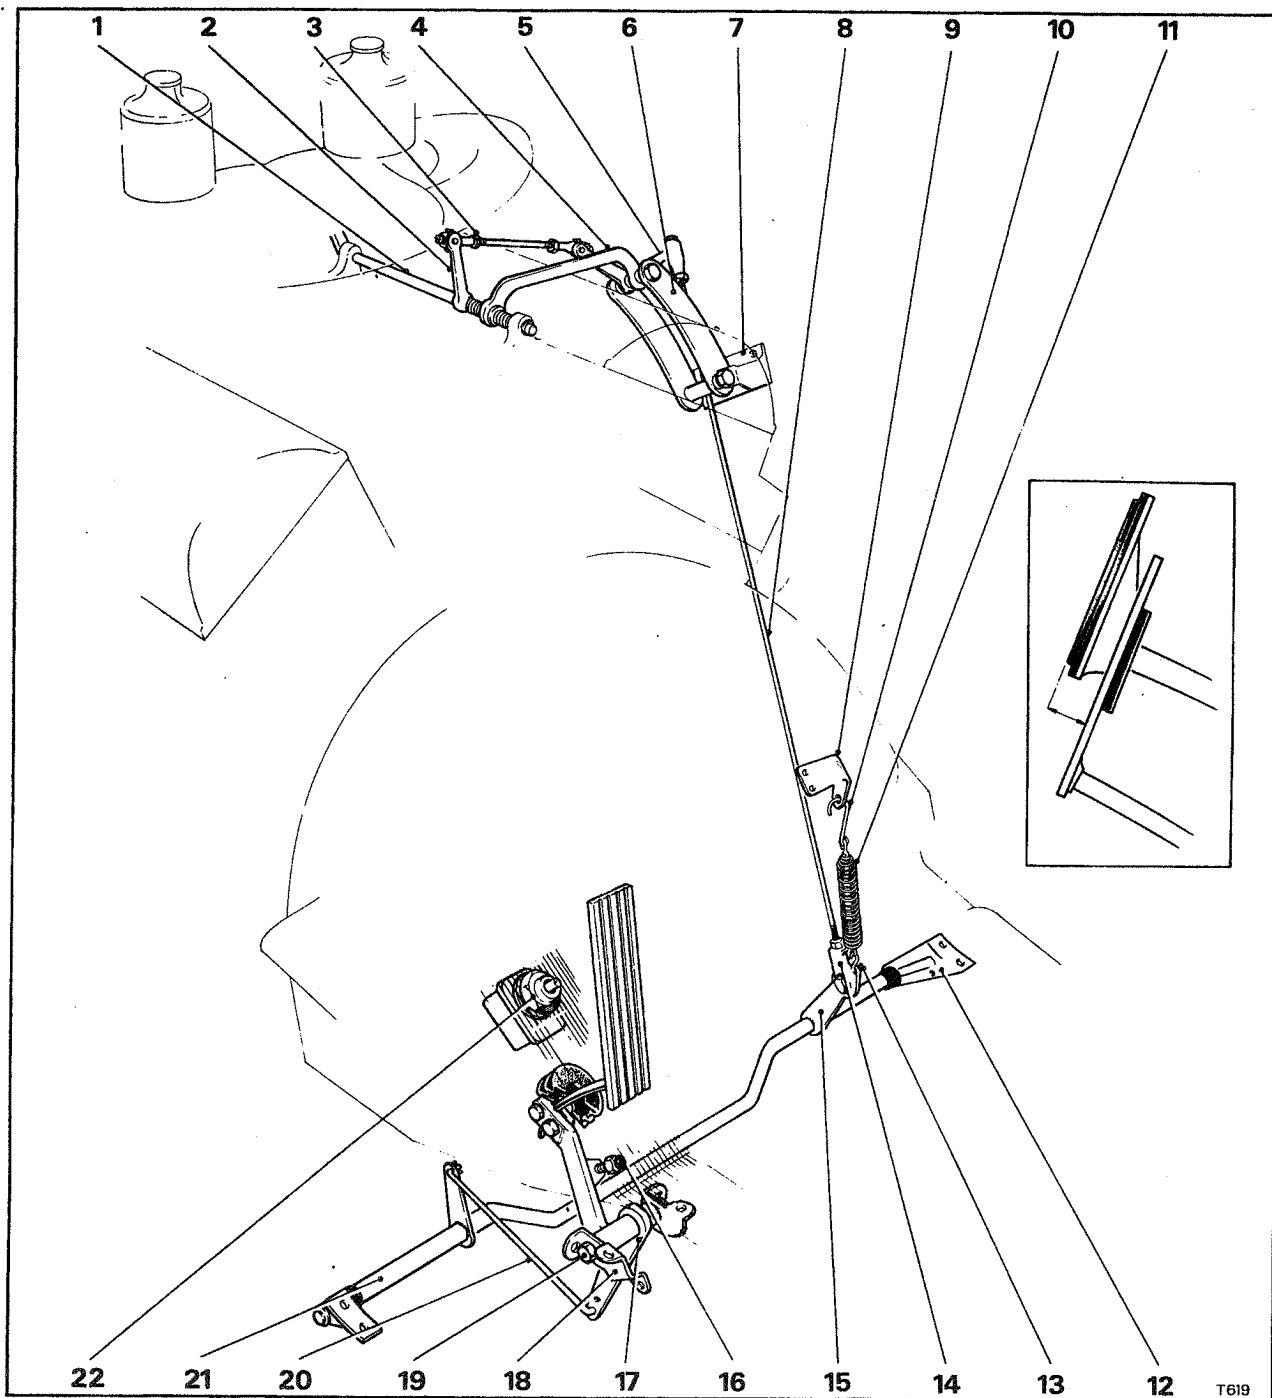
S.U. carburettor accelerator pedal and isolator mechanism (left-hand drive cars)
